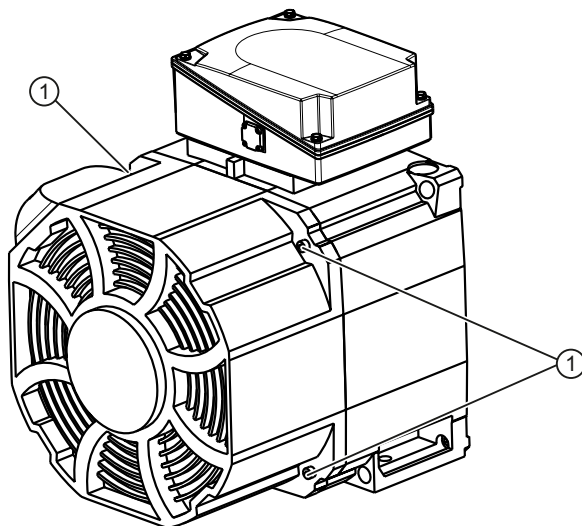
Unscrewing the external fan (1PH818., 1PH822.)
